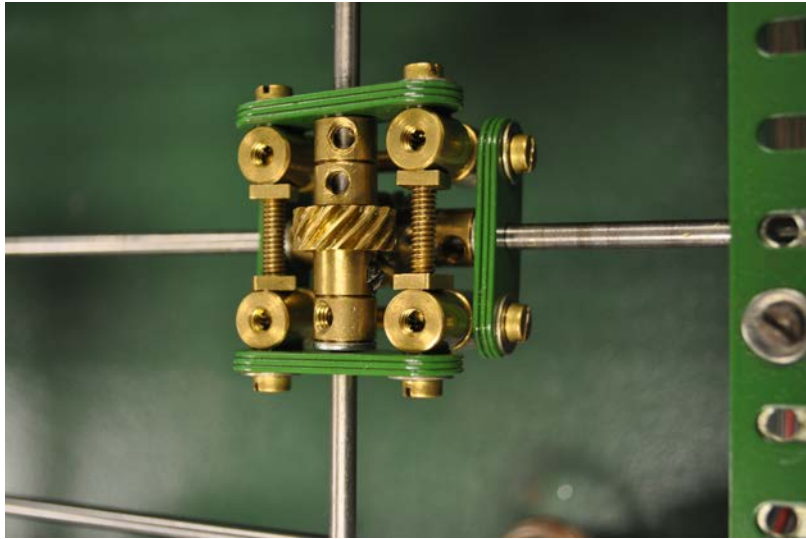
Up Close View of the Helical Gear Box; the rod journaled below is a bus-shaft that goes to the integrator, and the rod journaled above is a cross-shaft that continues along the section.
